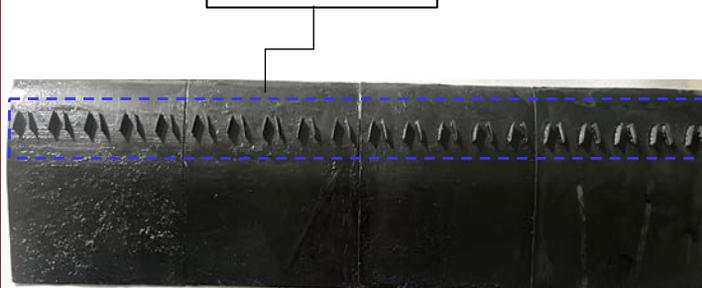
illustrates 3D printed blade model with airfoil-shaped miniature wings shows the overall design and integration of MWs on the blade surface.
